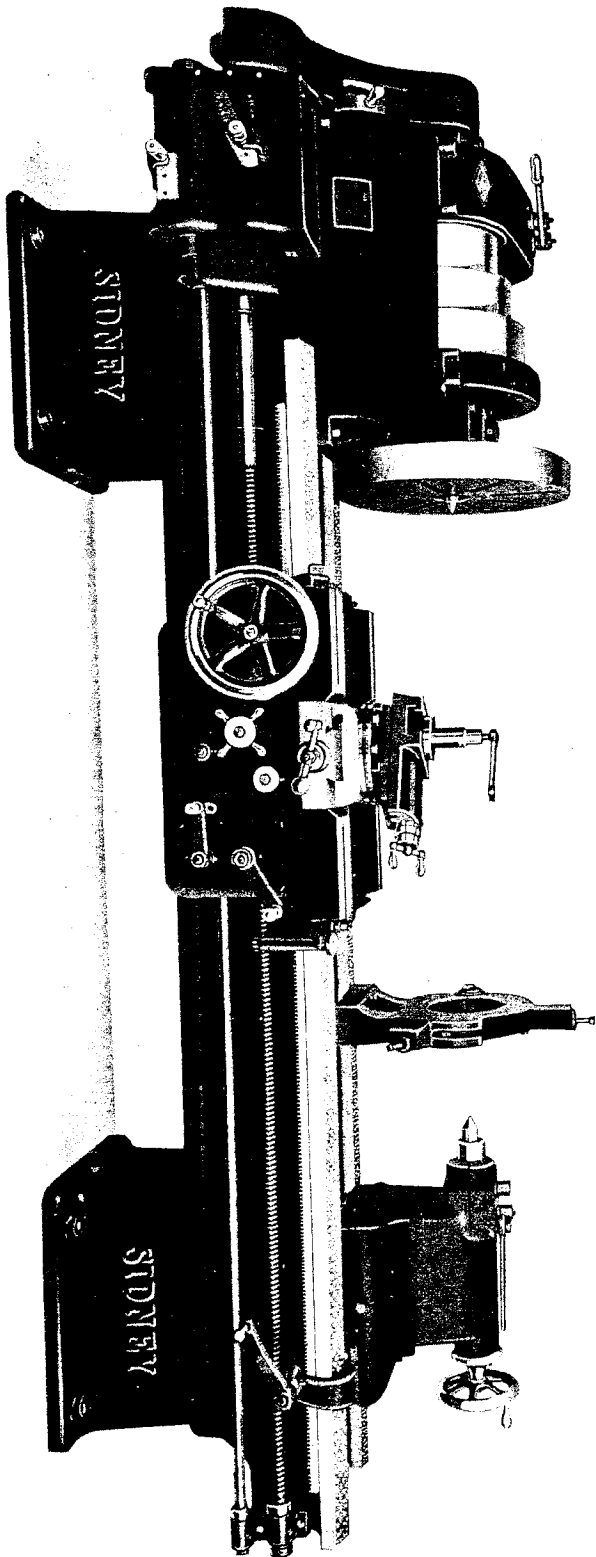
25" x 12' Sidney Heavy Pattern Quick Change Gear Engine Lathe.
